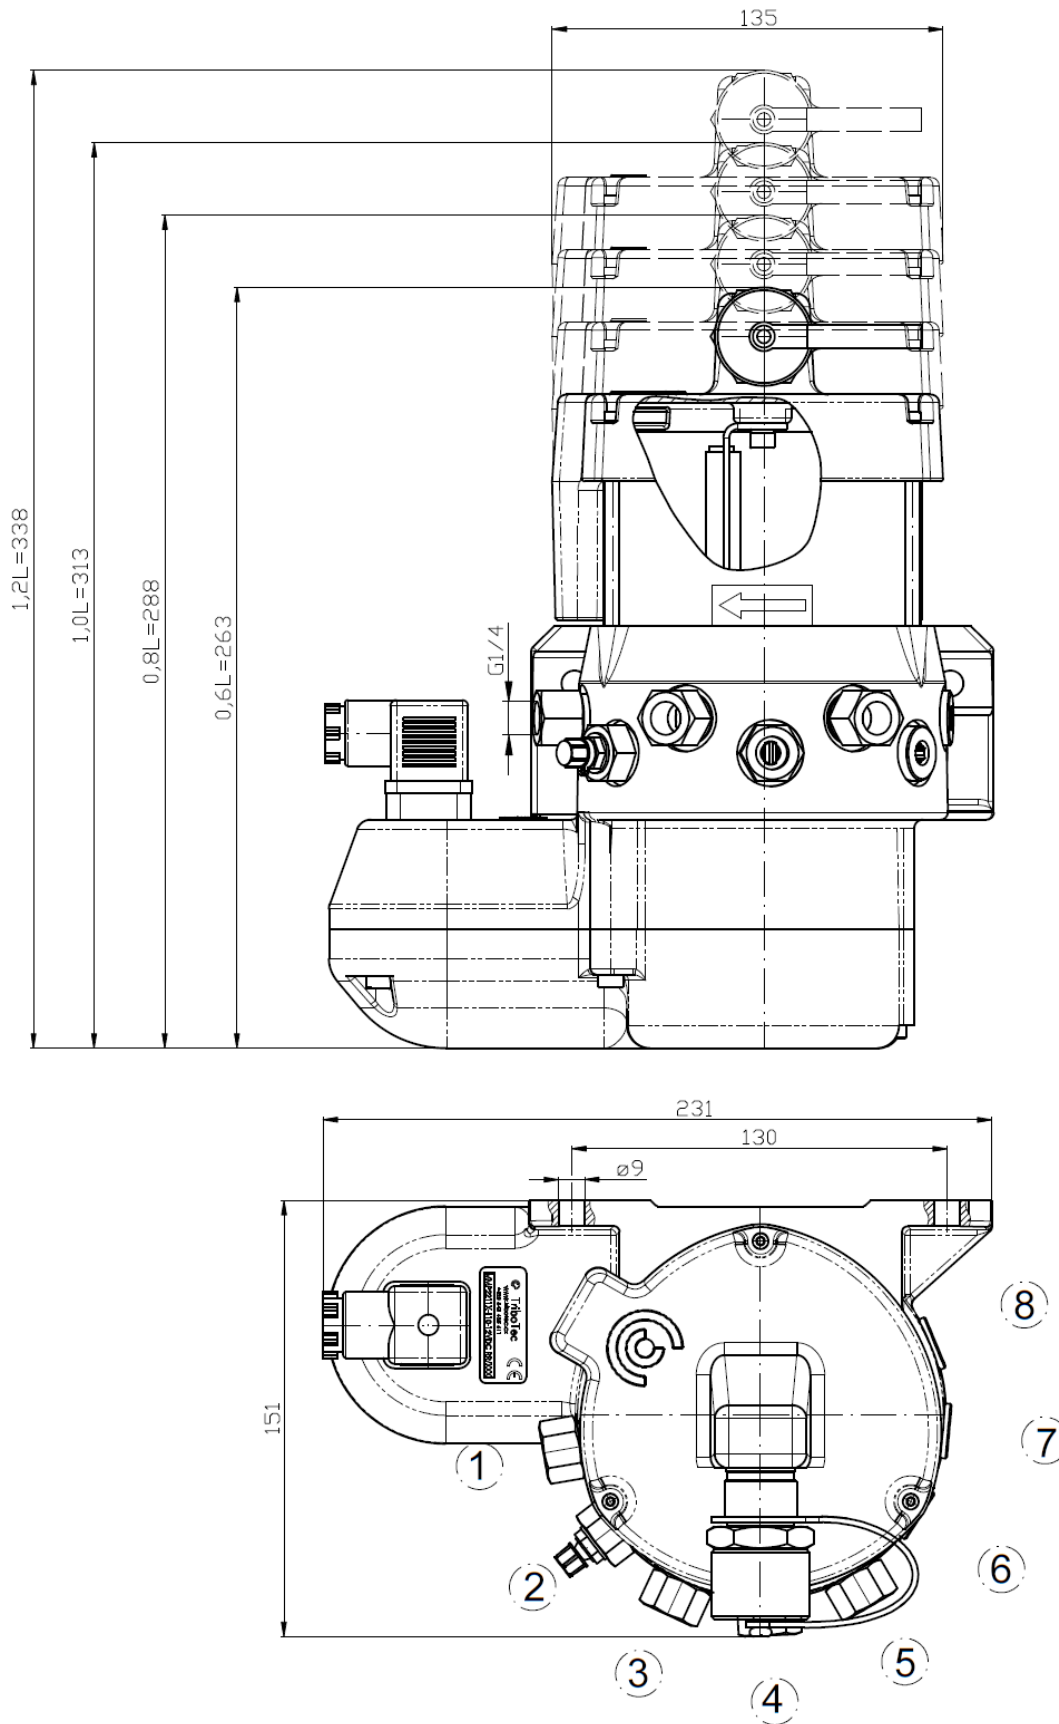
Dimensional drawing of MMP 131-V3X-200 lubrication pump
